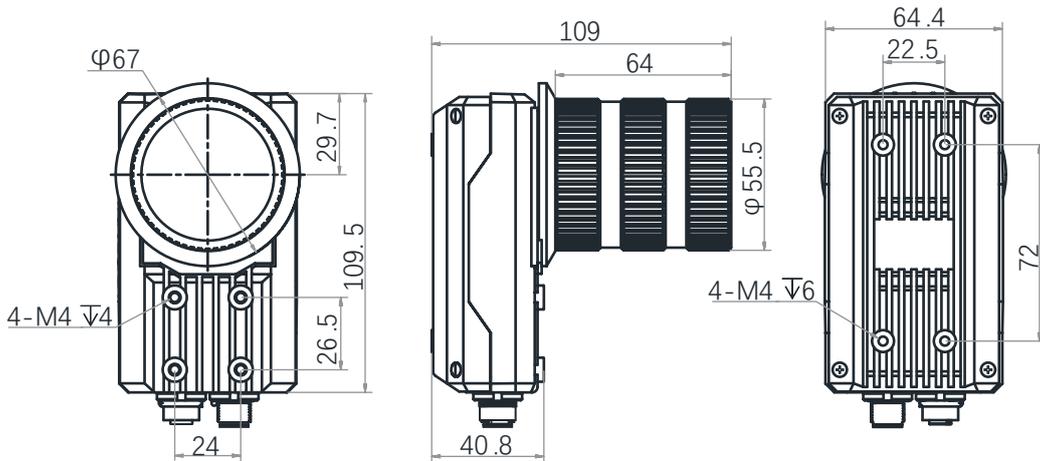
Mechanical Dimensions (in mm) of the code reader with 64.4 \* 109.5 \* 109 mm housing (Without light source and lens).
